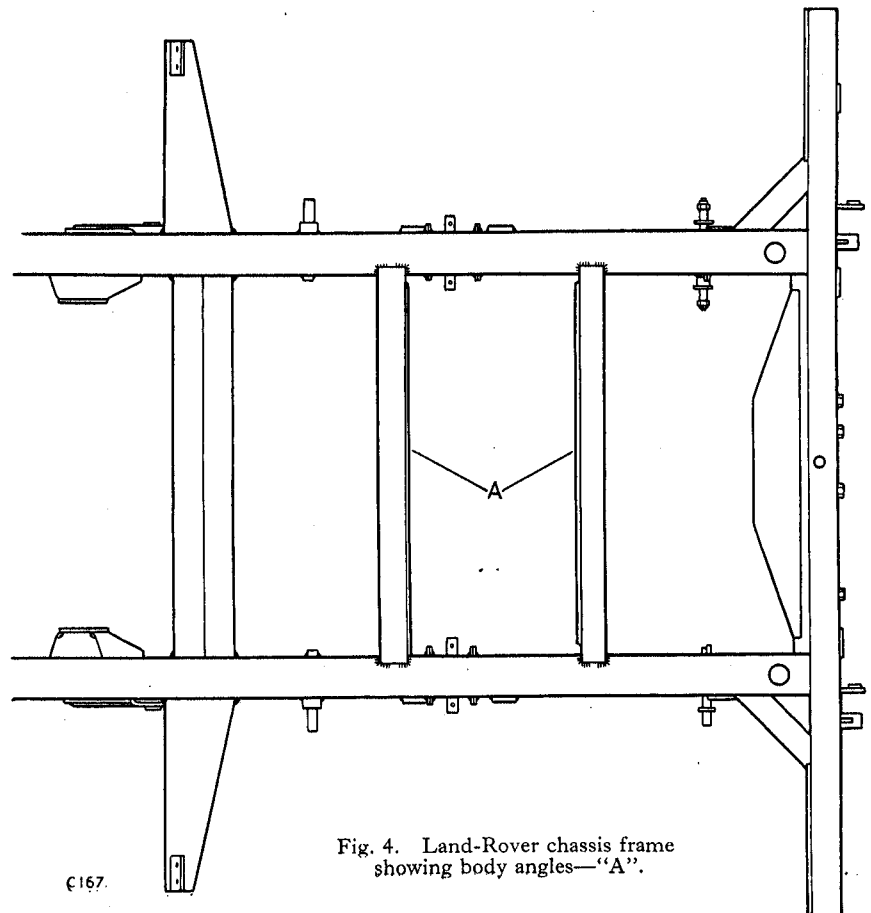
Land-Rover chassis frame showing body angles—"A".
